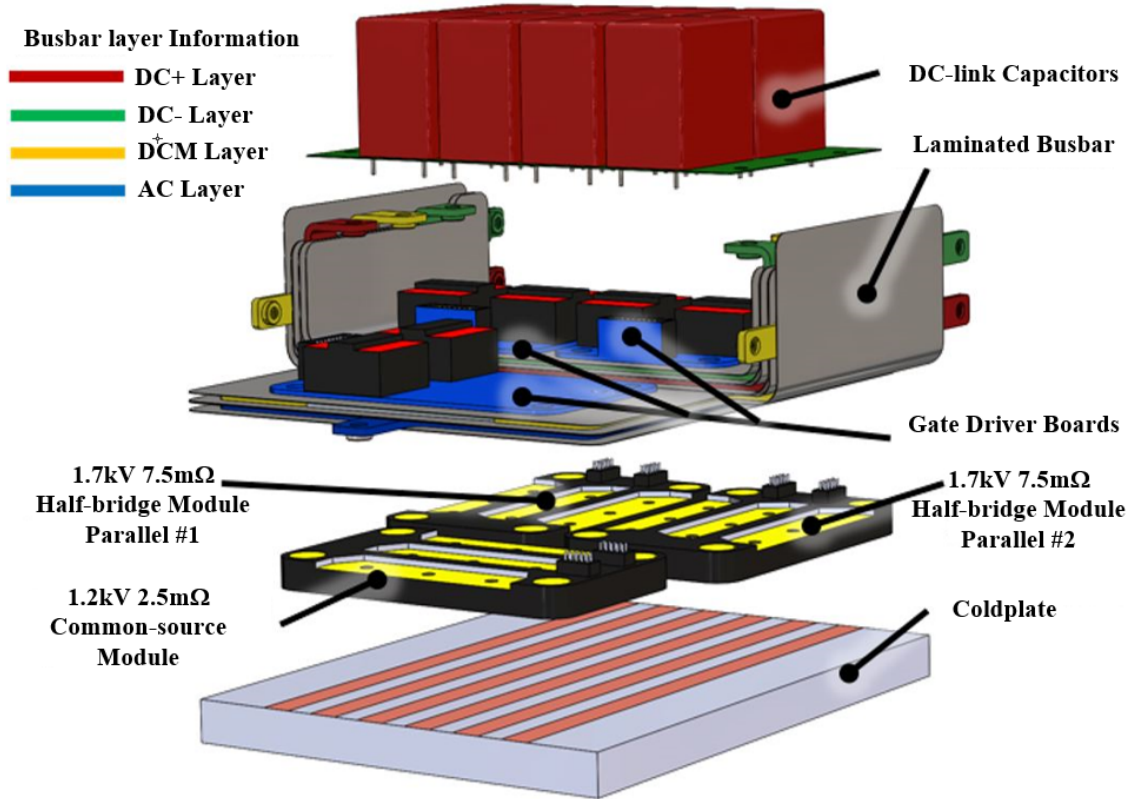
Exploded view for one phase of the 450-kVA converter
